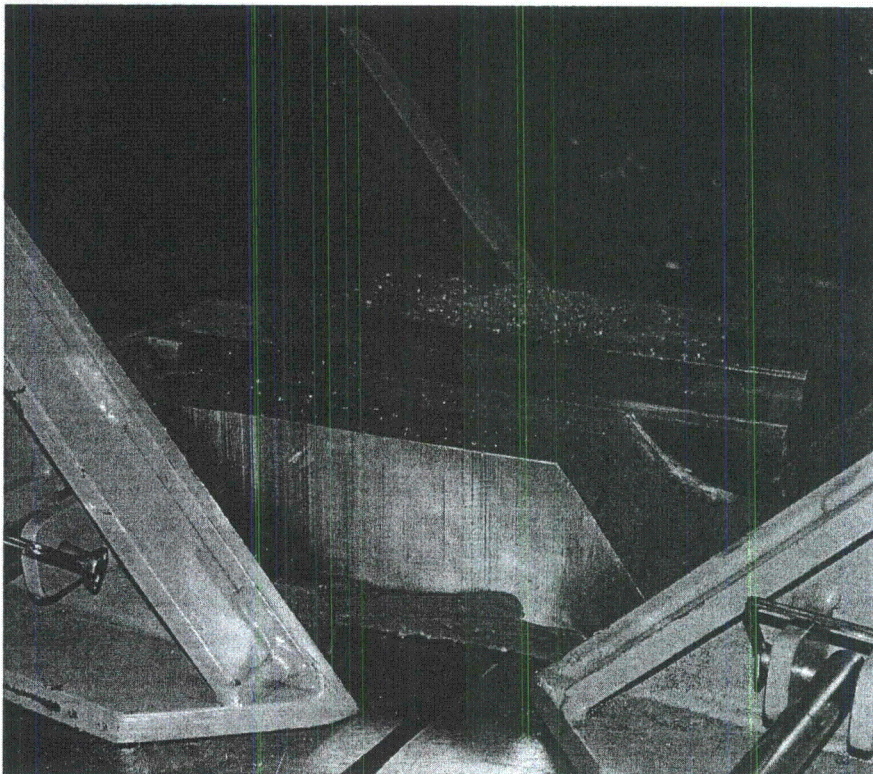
Nozzle 63 Assembly Cut in Half by Dissection Cut
